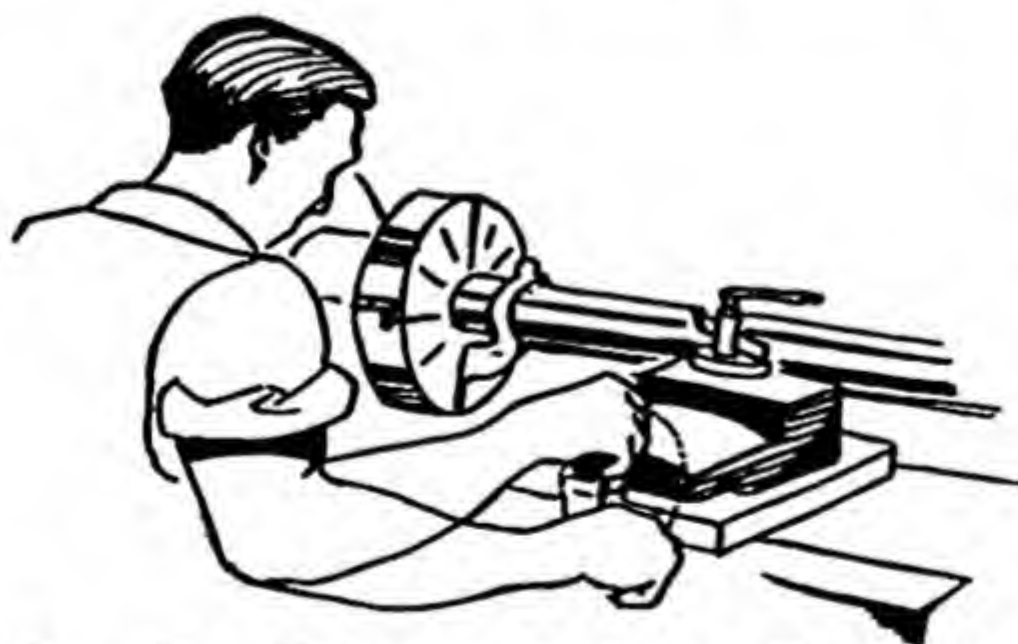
Forearm motion; elbow acting as ball and socket joint.
